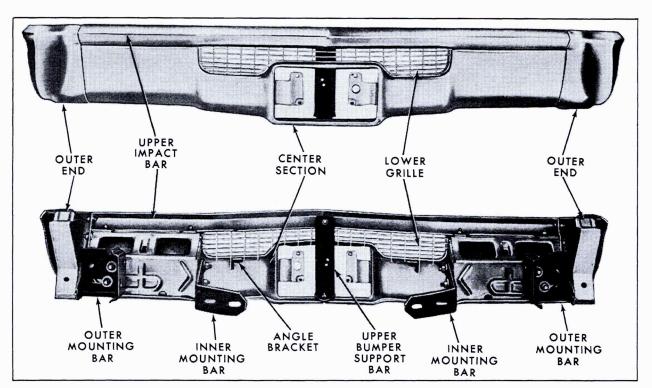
Eldorado Front Bumper - Front & Rear View
